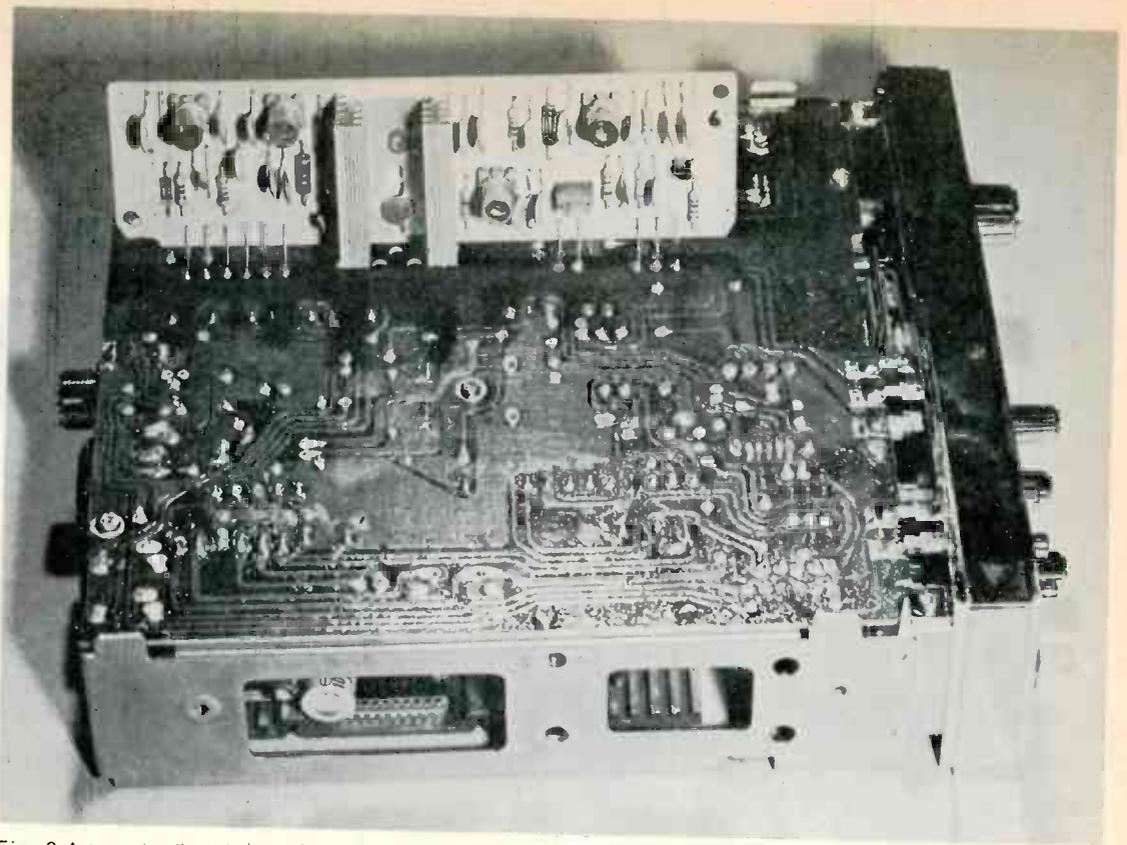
A "mother" circuit board supplies the copper-bonded connecting wires, and the module pins are soldered to this board. To obtain more room for power-on servicing, the modules can be removed and soldered on the bottom of the board, as shown.
